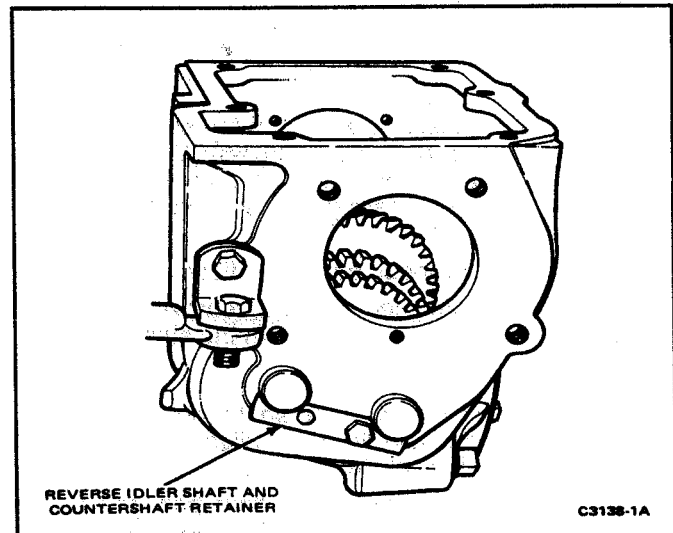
Reverse Idler Gear Shaft and Countershaft Retainer
